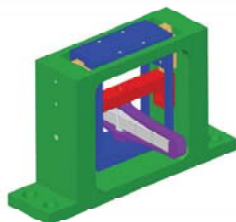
Isometric view of assembled Piezo-actuator based workpiece feeding system.
